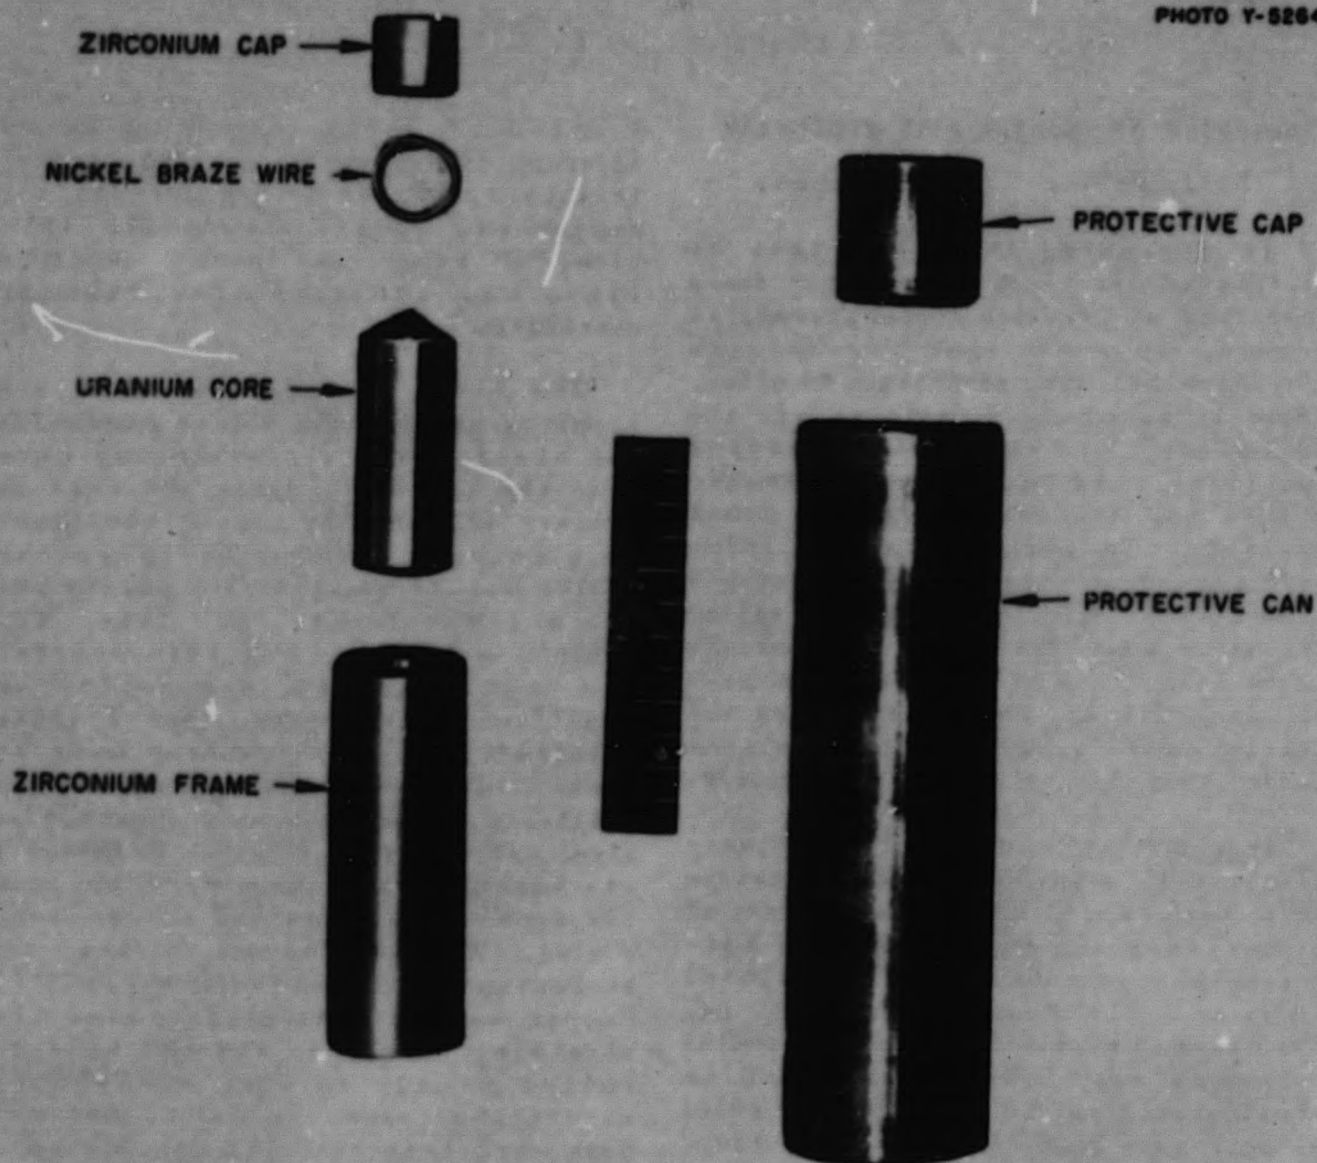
Unit Parts of Billet Assembly Used in Roll-Cladding Zirconium to Uranium.
